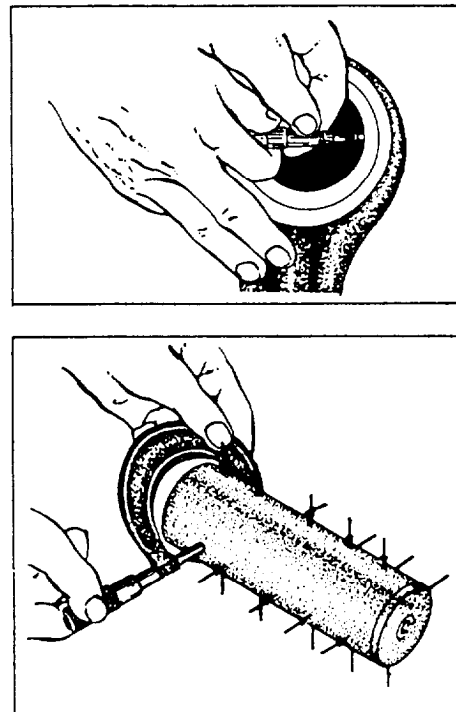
Measuring a piston pin and piston bushing for wear.
